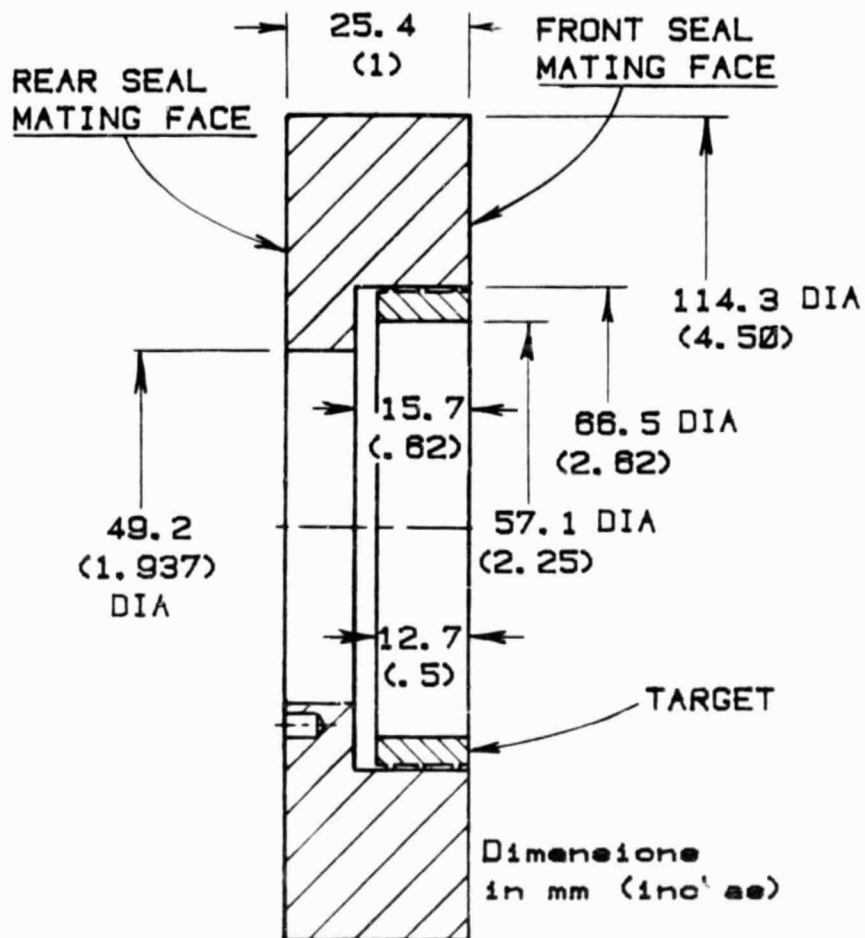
ROTOR AND TARGET DIMENSIONS
